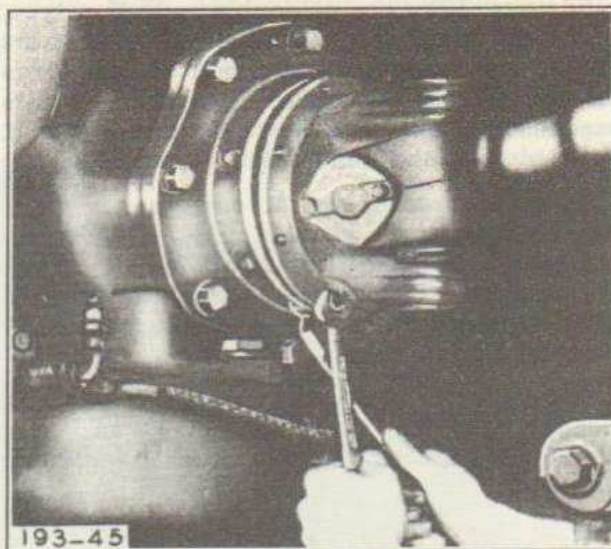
Removing Propeller Shaft from Forward Axle Unit
